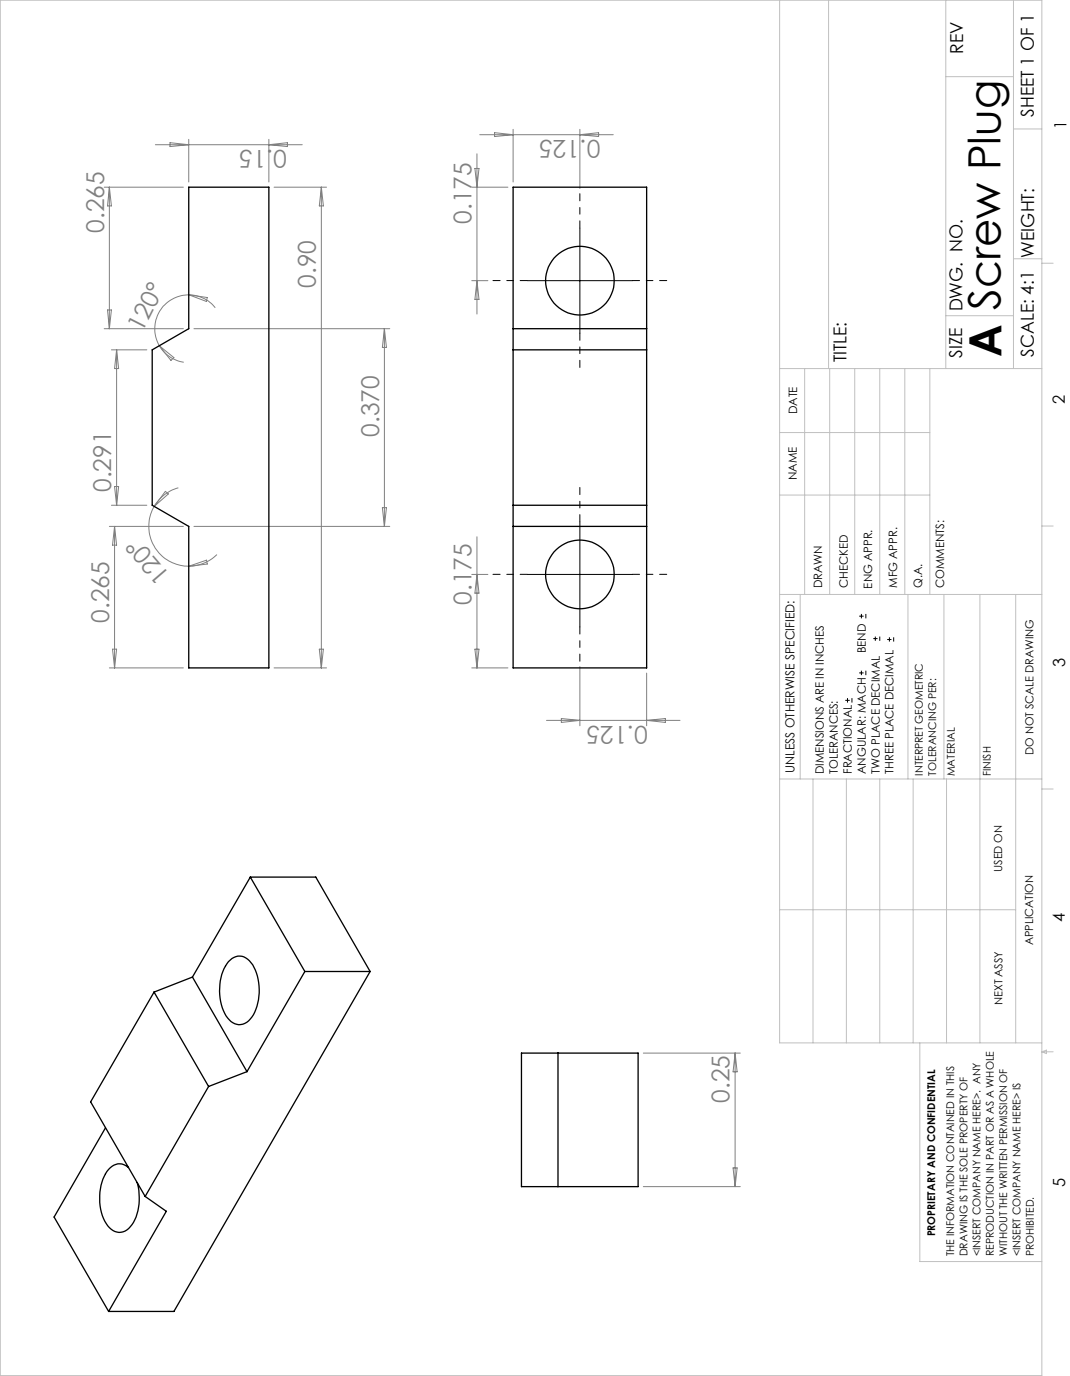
Drawing of clamp used to hold microcapillaries in nozzle.
